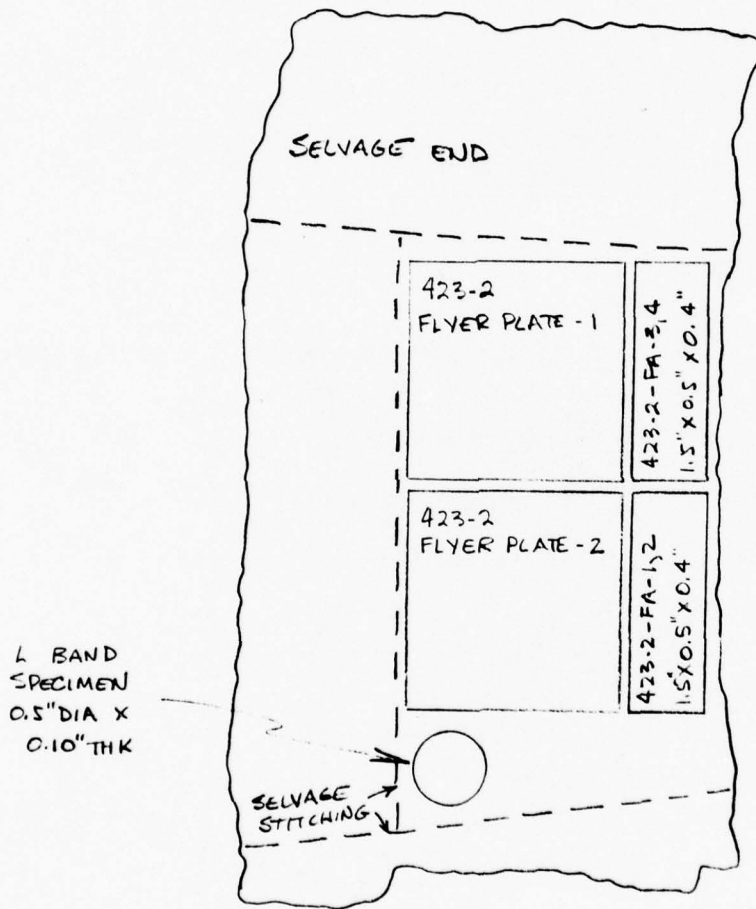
Sampling Plan: ADL-4D6 Plate 423-2
